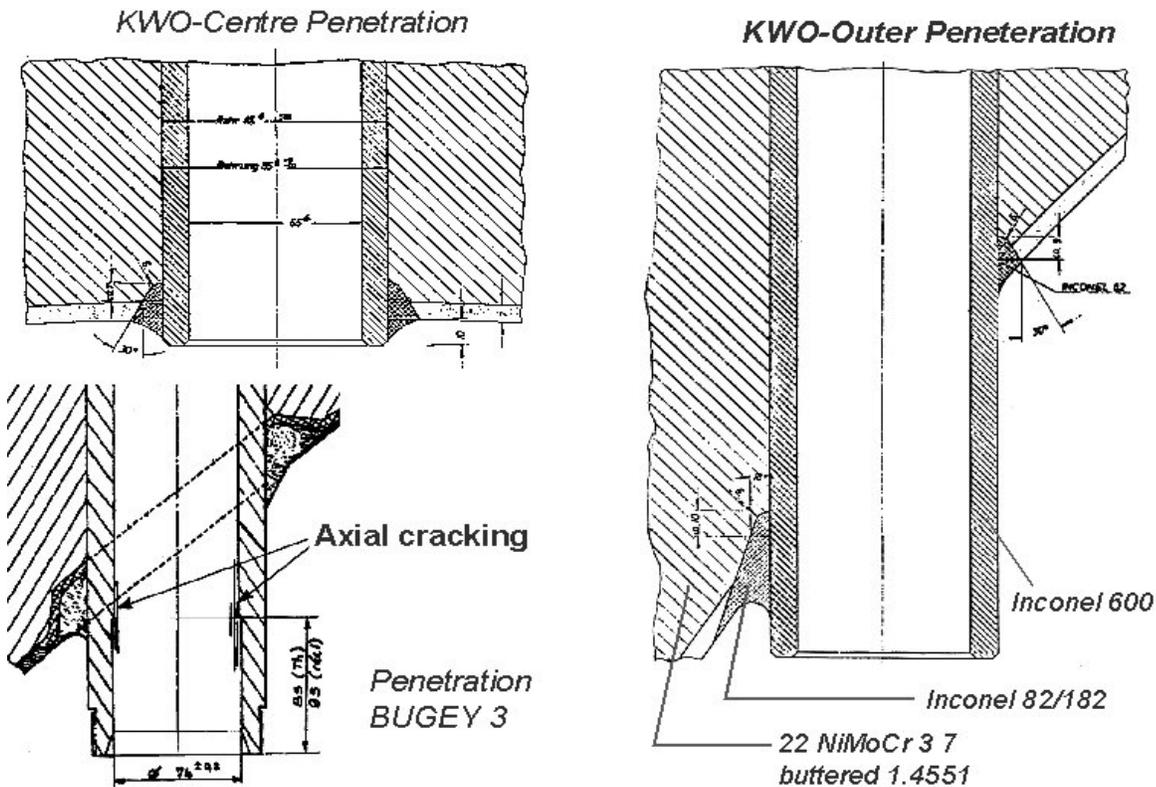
Weld layout at different locations of head penetrations in the RPV head
